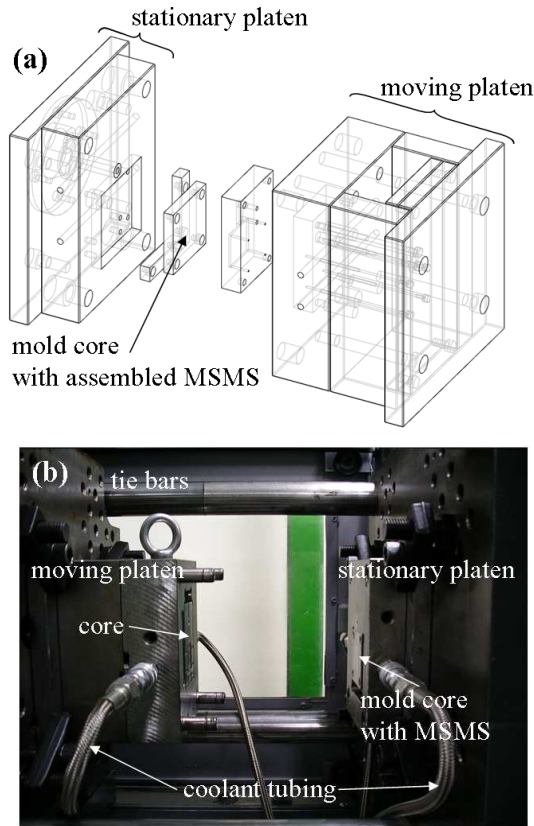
(a) Schematic design of the mold base for microinjection molding process and (b) photograph of the installed mold base
